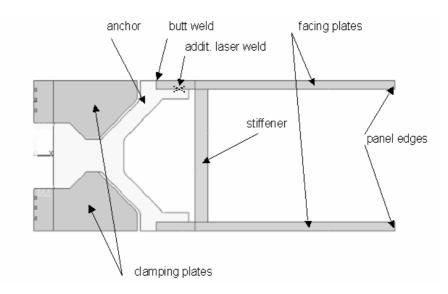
mechanical joint with damping plates.
